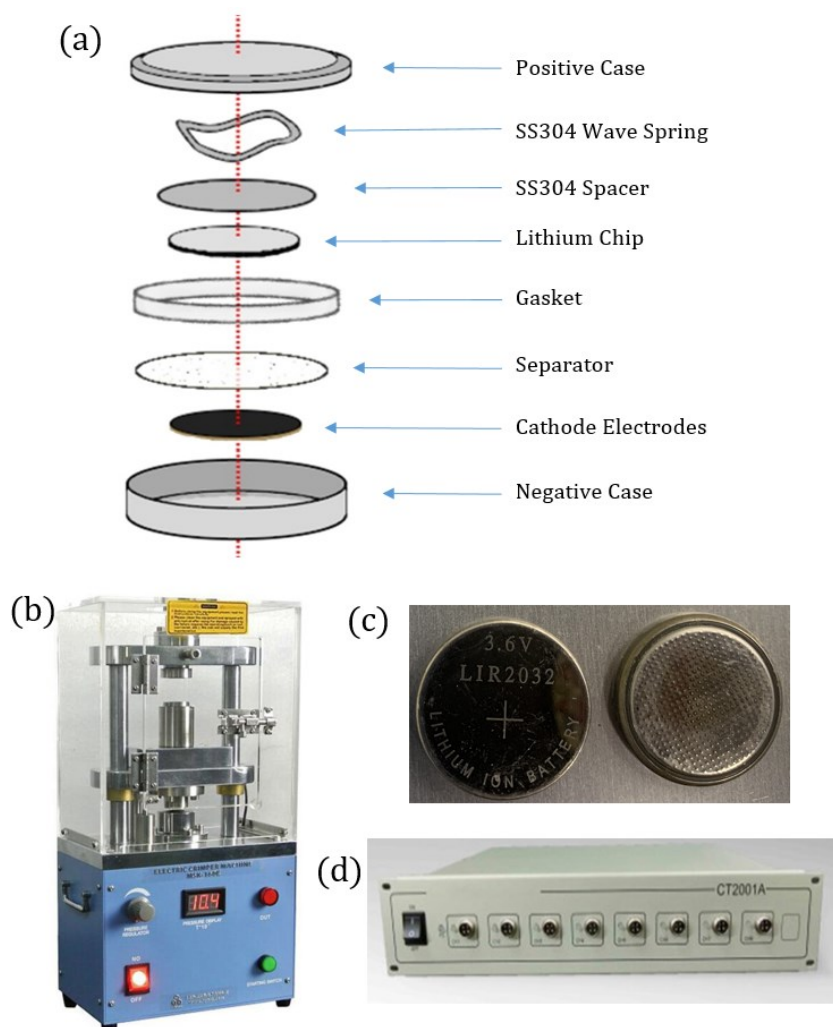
(a) Coin cell assembly explosive view, (b) MSK-160E digital coin cell assembly crimper, (c) assembled CR2032, and (d) CT2001A classic battery tester.
